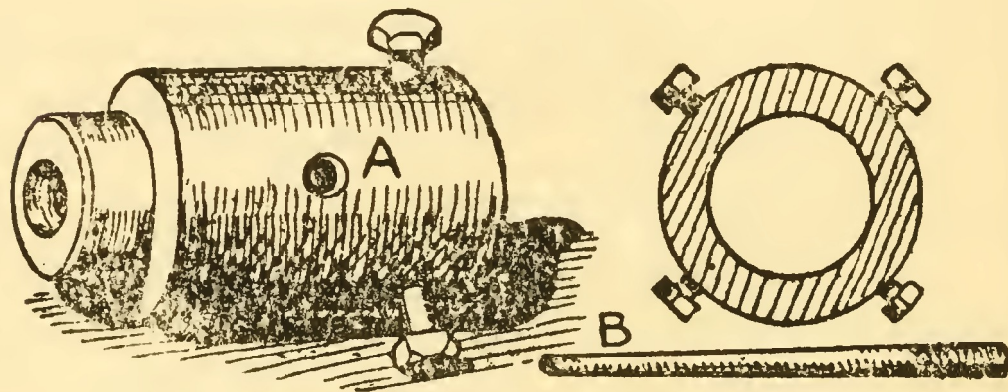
METAL CHUCK: A, HOLE; B, TOMMY BAR.
